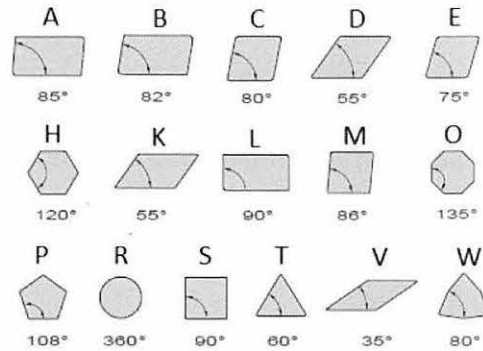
Typical insert shape used in turning machining (MachiningCloud inc, 2016)
